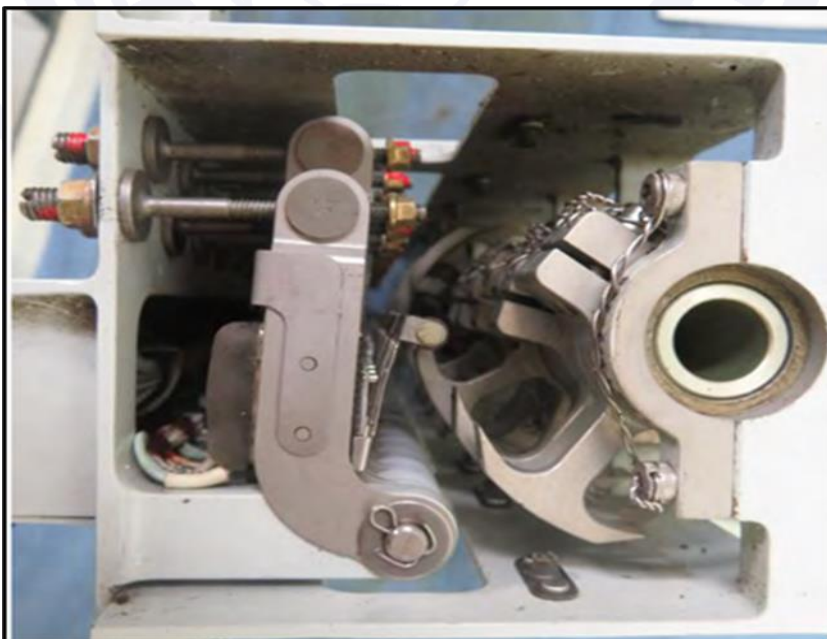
Left lateral view of the Microswitch Box disassembly.
